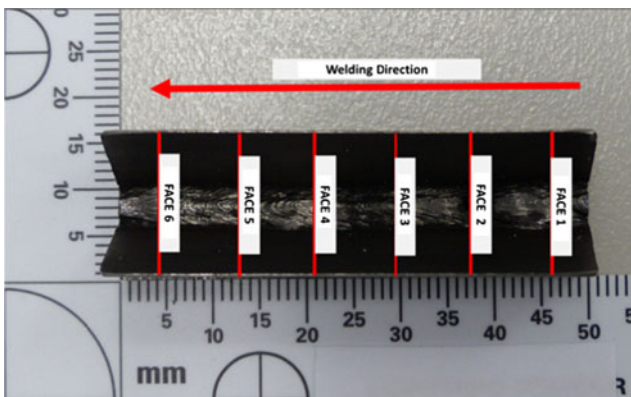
Weldability test piece with the location of the six faces to be examined under an optical microscope at a magnification of $\times 400$ highlighted
